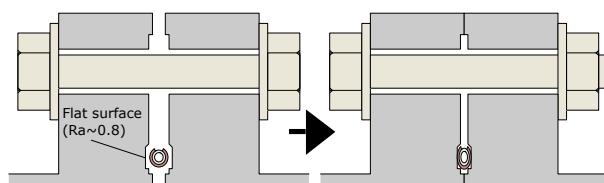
Sealing mechanism of the cERL flanges when a metal O-ring is used.
